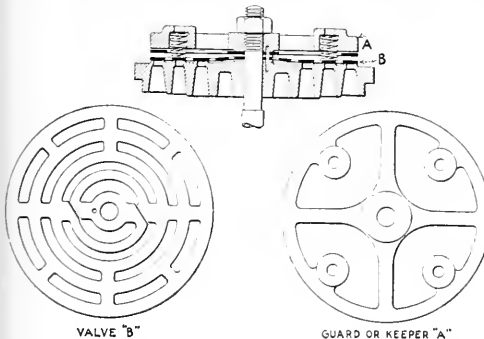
THE ROGLER PLATE VALVE (INGERSOLL-RAND CO.)
